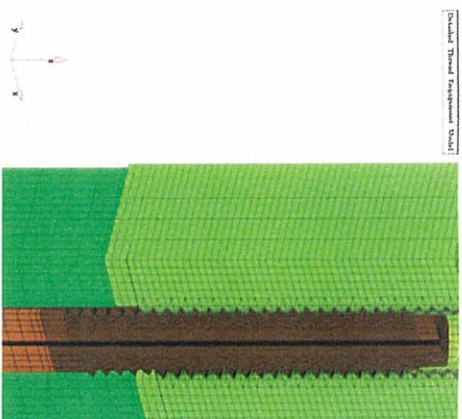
Detailed thread engagement sub model with a cross section view, exposing the bolt and thread contact surfaces.
